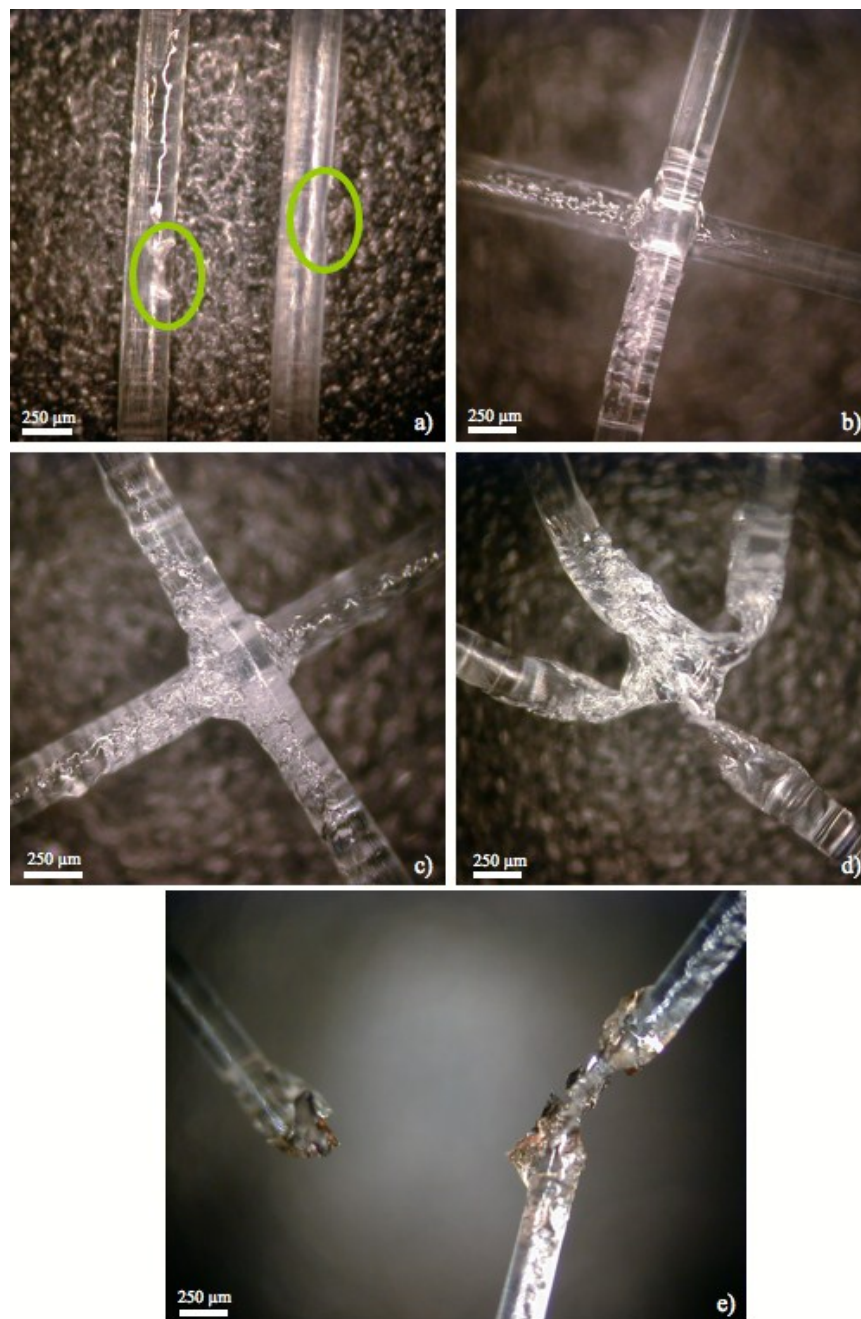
Examples of each category. a) No weld. b) and c) Welded Fibers. d) Weld with Polymer Degradation. e) Severed Fibers.
